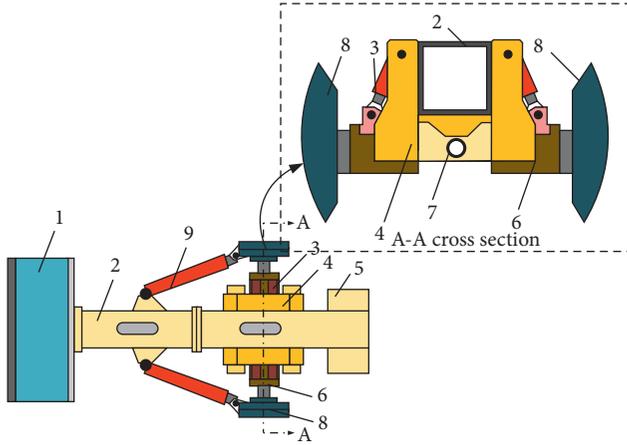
Horizontal single-support structure model of the shield machine. 1, cutter head; 2, main beam; 3, torque cylinder; 4, saddle frame; 5, rear leg; 6, horizontal supporting cylinder; 7, cross pin; 8, gripper shoe; 9, propulsion cylinder.
